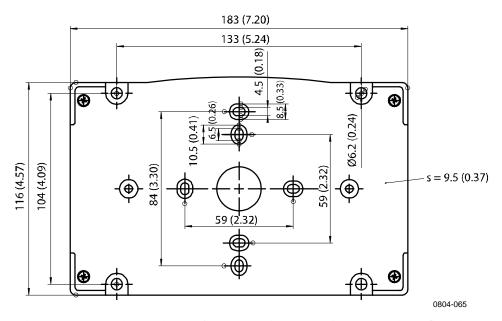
Dimensions of the Plastic Mounting Plate (mm/inch)
